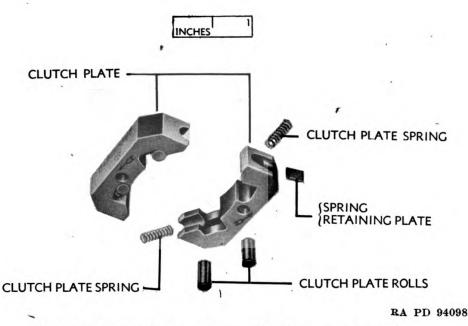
20-mm feed mechanism M3-Parts of clutch plates.
